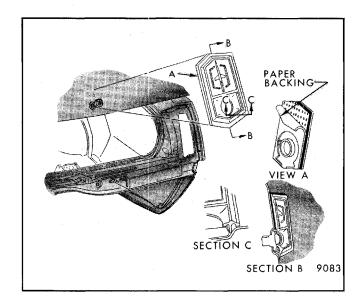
Oldsmobile Adhesive Backed Lock Cylinder Emblem
